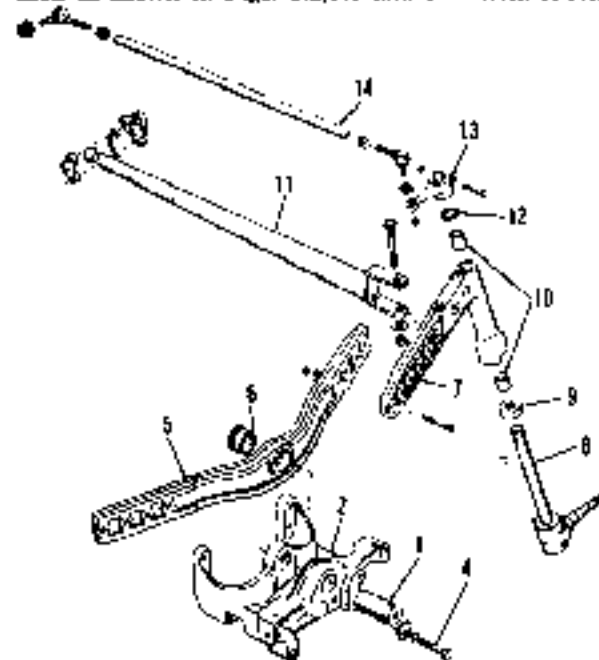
Exploded view of straight back axle used on some MF240 and MF250 models. Refer to Fig. 2 for legend except radius rods (11).
